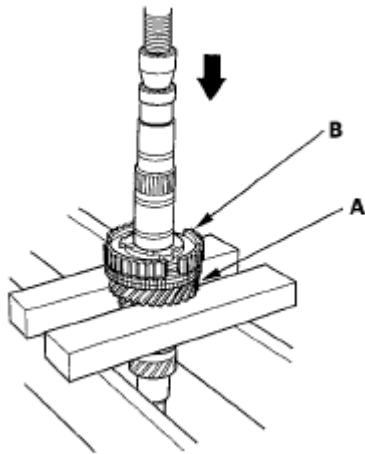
Pressing Mainshaft Out Of 3rd/4th Synchro Hub
